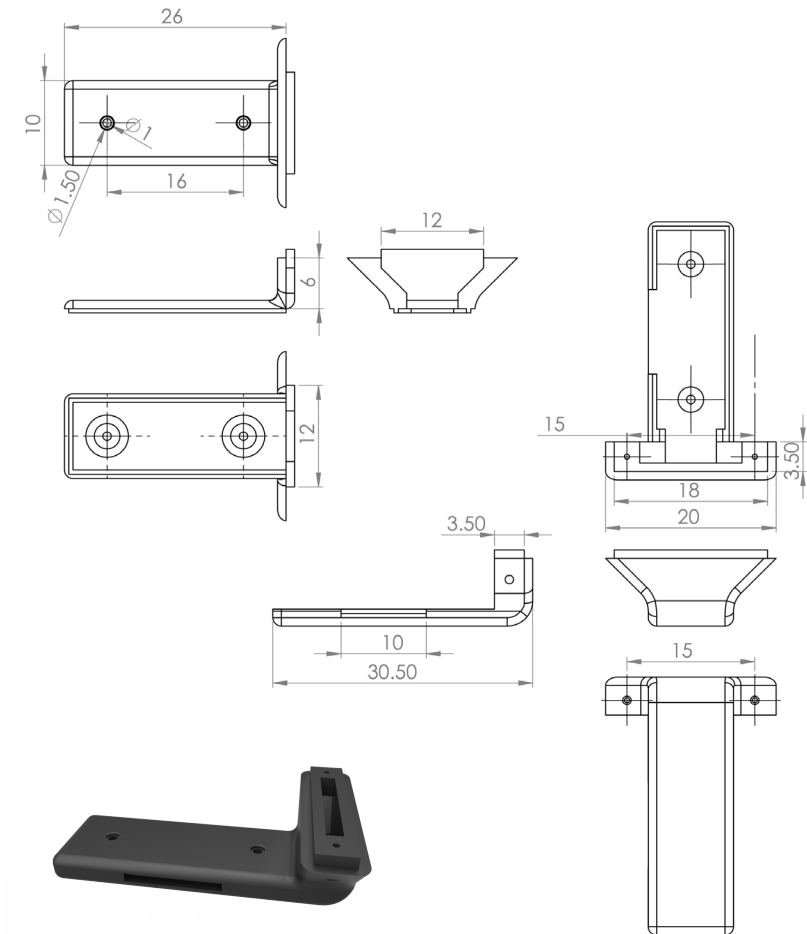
Figure showing the engineering drawing of the clip, all measurements are in mm.
